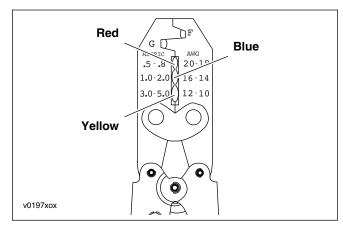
Packard Crimp Tool (Part No. HD-38125-8)
